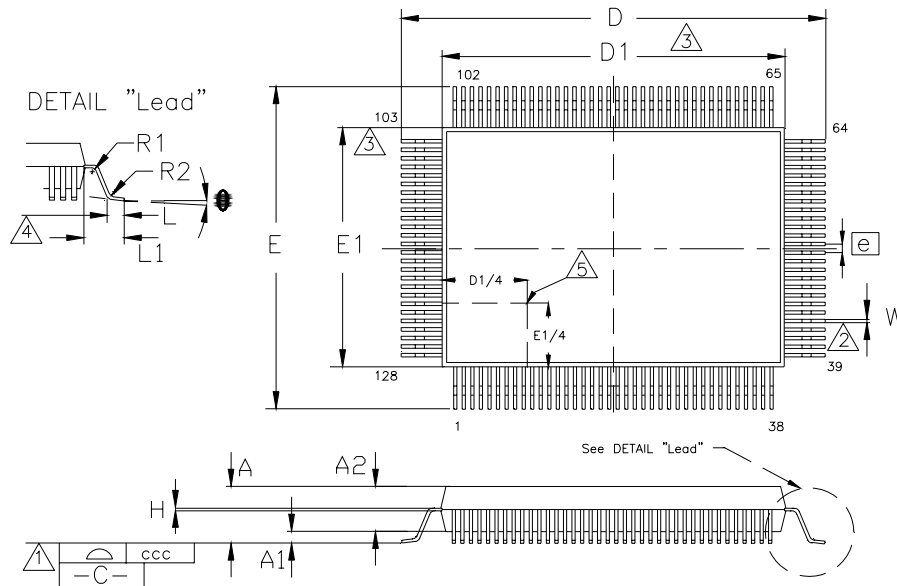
128 Pin QFP Package Outline, 14x20x2.7 Body, 3.2MM Footprint
